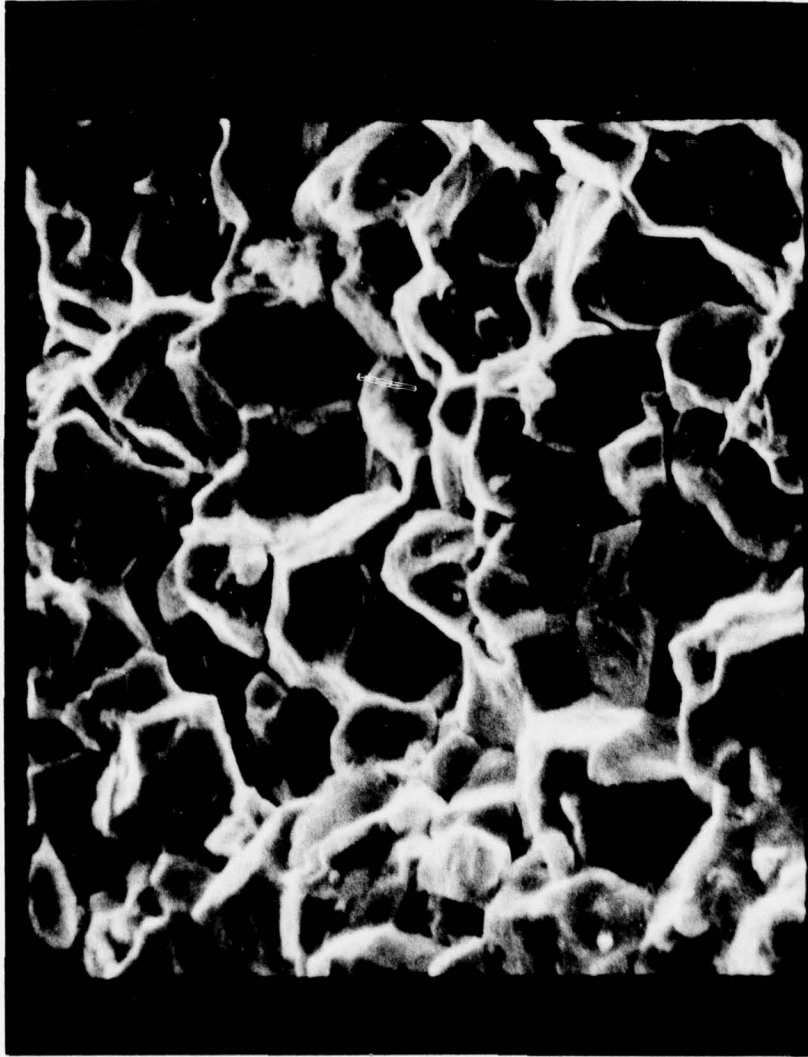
Transmission electron fractograph showing intergranular fracture mode
